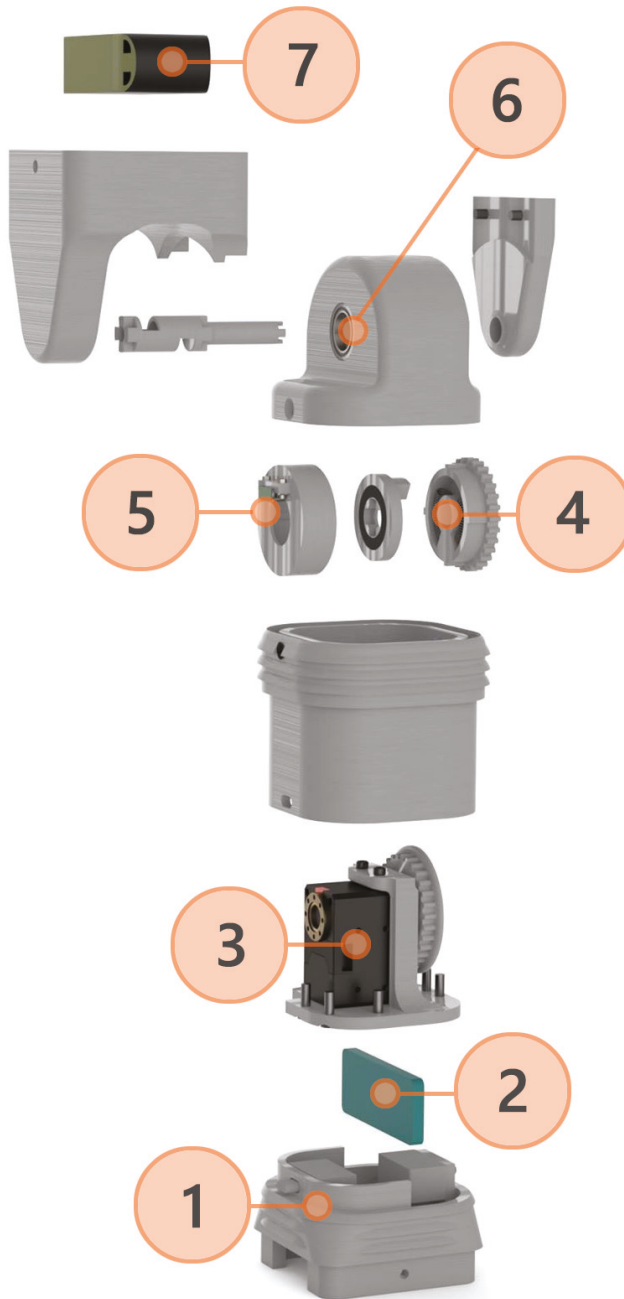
An exploded view of a joint module: (1) screw-less assembly mechanism; (2) micro-controller; (3) actuator; (4) elastic gear; (5) rotary encoder; (6) bearing; and (7) battery-pack.
